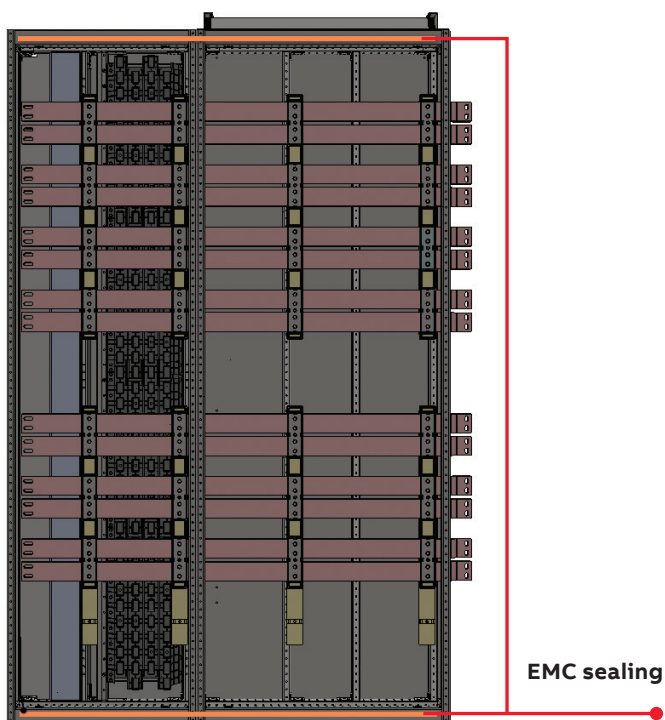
EMC sealing for rear walls of the MNS-Up section
